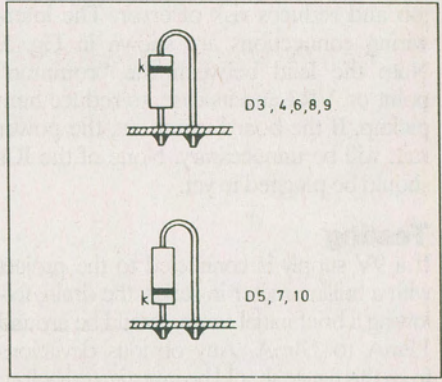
Polarity guide for mounting the diodes on the PCB.
